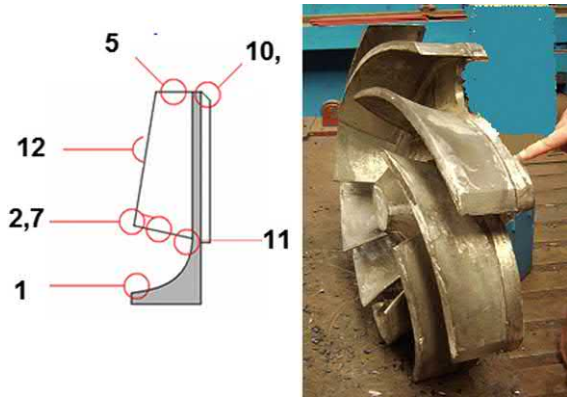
Common areas of damage in semi open and open impellers.
